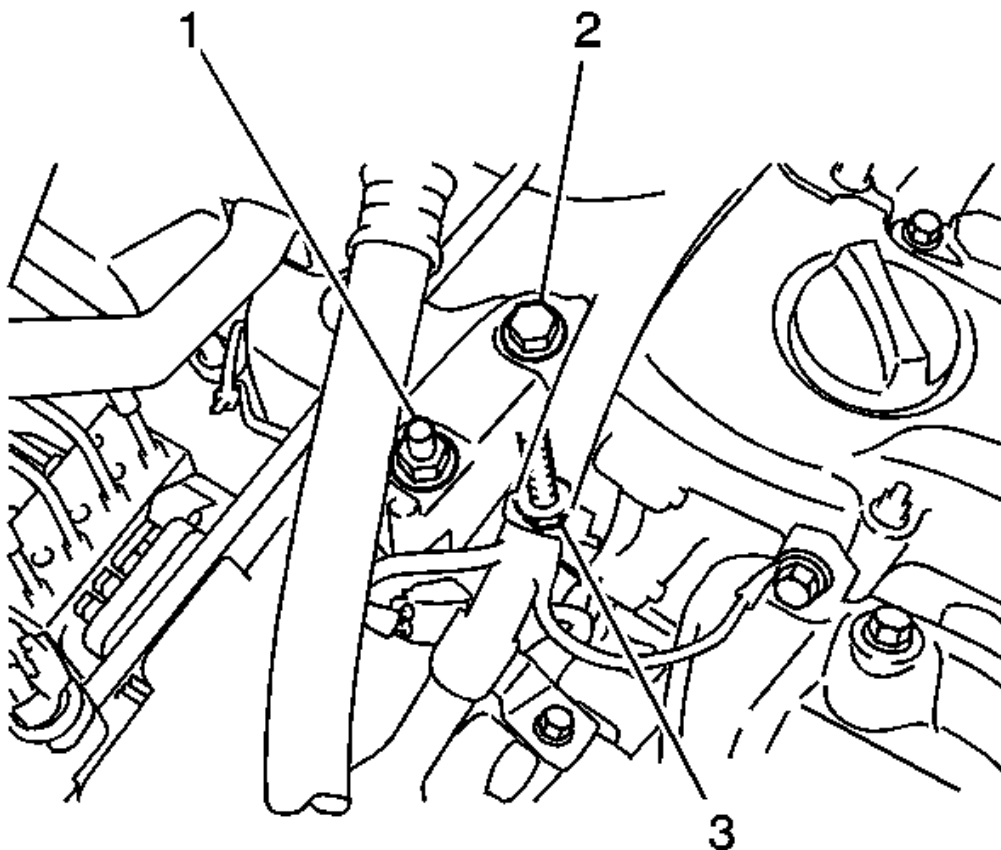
Identifying Right Engine Mounting Insulator Nuts
